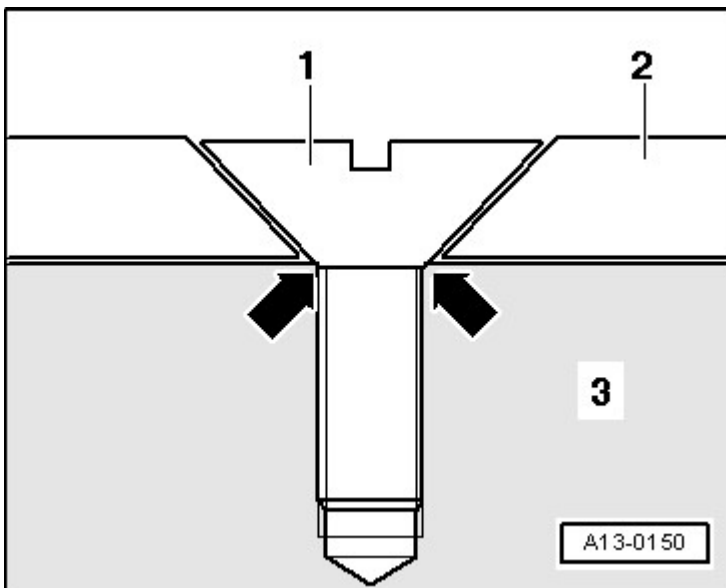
Identifying Attachment Points, Countersunk Screws, Crankshaft & Sensor Wheel
